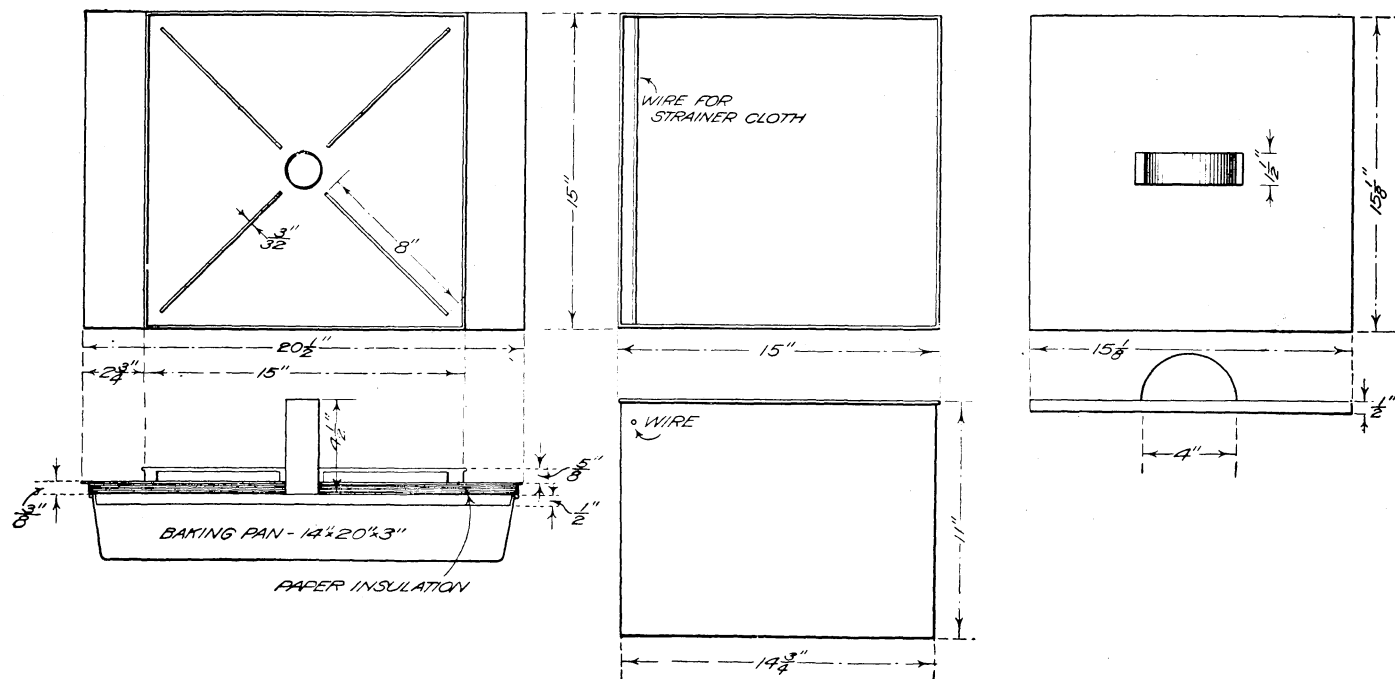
Dimension drawing of the parts of the sterilizer.
